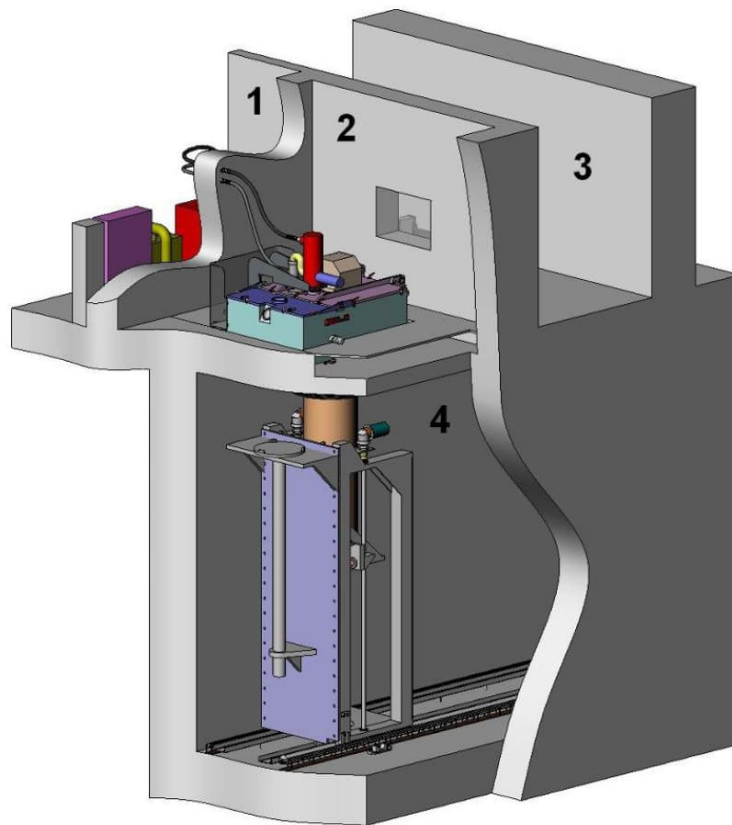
Cross-section of Posiva's design of an electron beam welding chamber. Upper left to right: 1) room for auxiliary devices 2) welding room and welding machine 3) control room and 4) canister transfer corridor (Suikki 2008).
